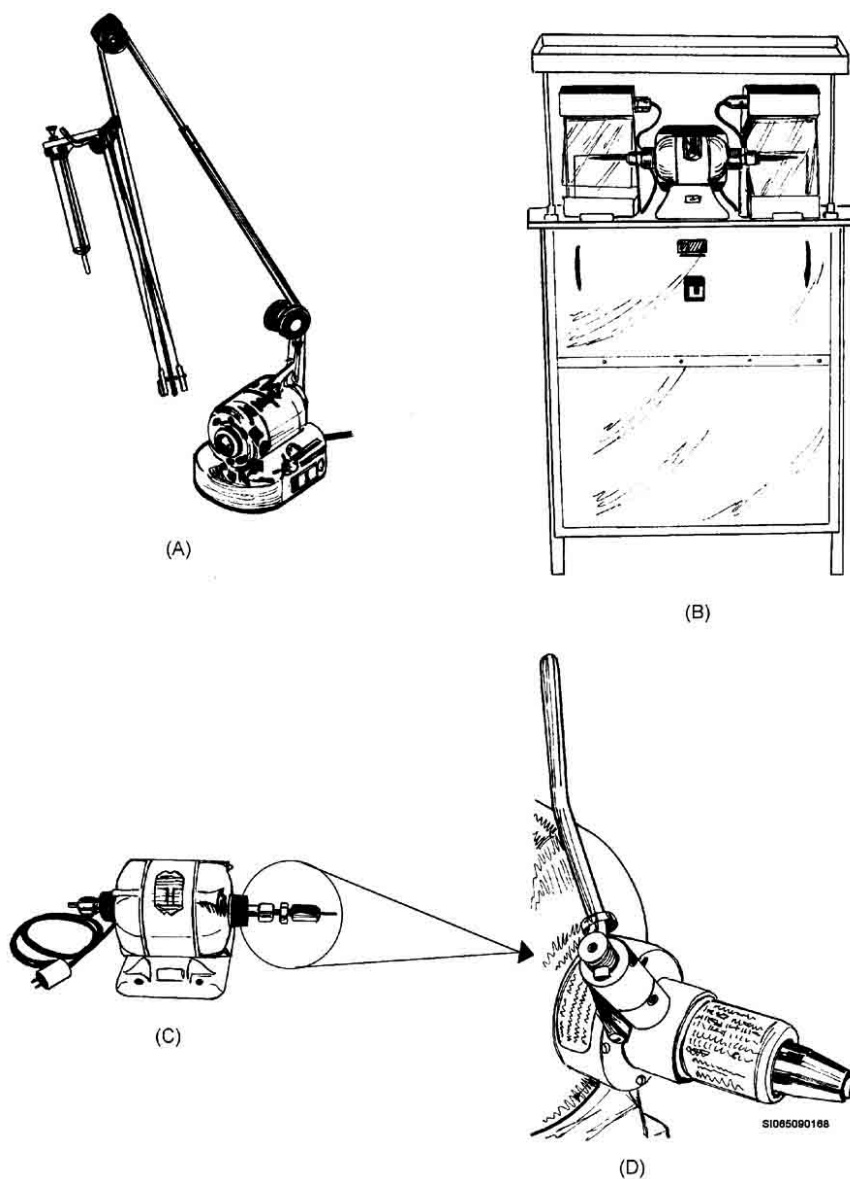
Dental engine, floor-mounted lathe, bench-mounted lathe, and quick-release chuck.
